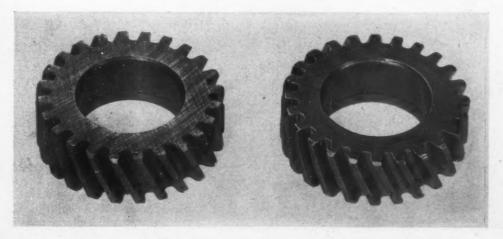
Left—Mild steel gear barrel finished at \$0.018 per gear as compared to \$0.06 previously, provided greater uniformity, increased production and tooth surfaces approaching the so-called runin tooth condition
